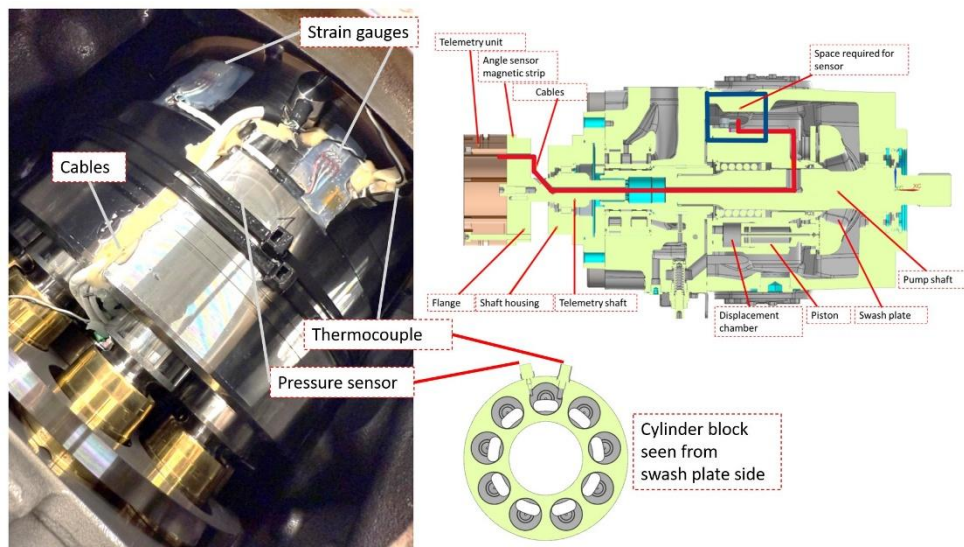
Sensor integration in H1P 280. Two strain gauges, a pressure sensor, and a thermocouple are fitted onto the cylinder block with cables that are guided through a customized hollow shaft to a telemetry unit.
